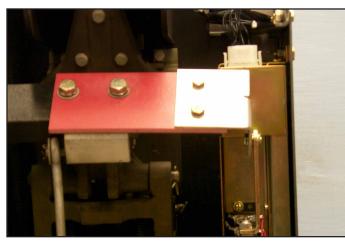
Reset Bracket Assembly Mounted to the Breaker Cross Bar.
